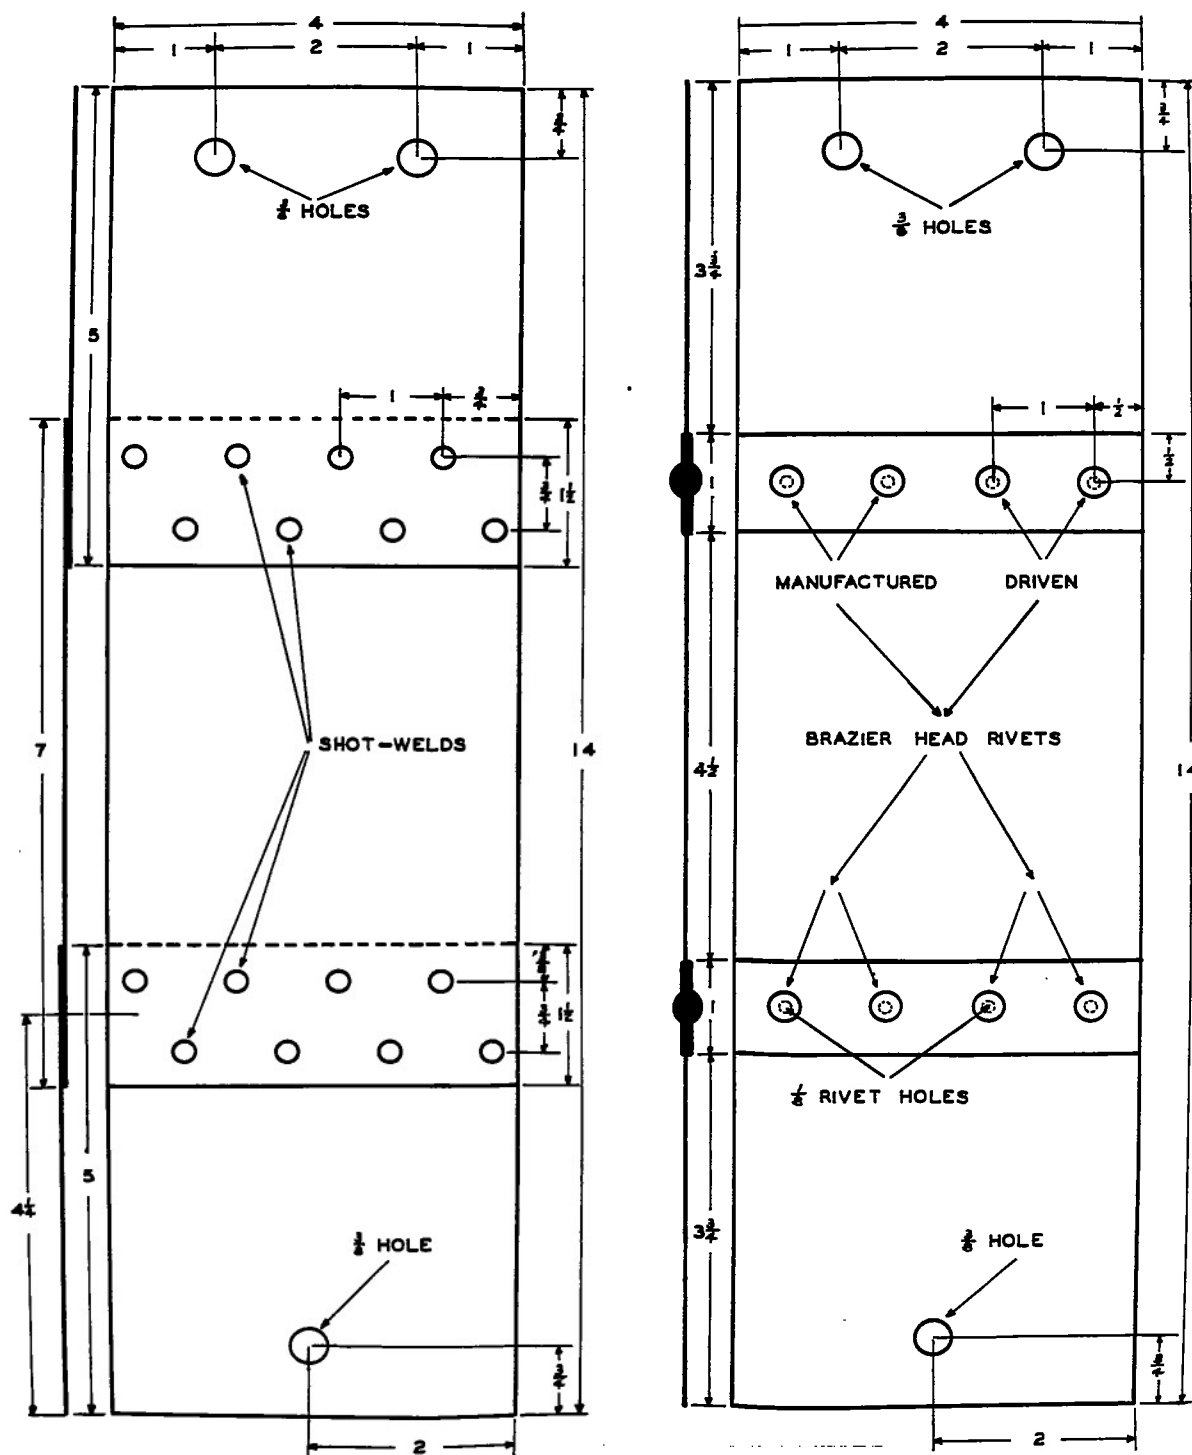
Type of panels used for determining the corrosion of shot-welds, or of dissimilar metals. All dimensions are in inches.
